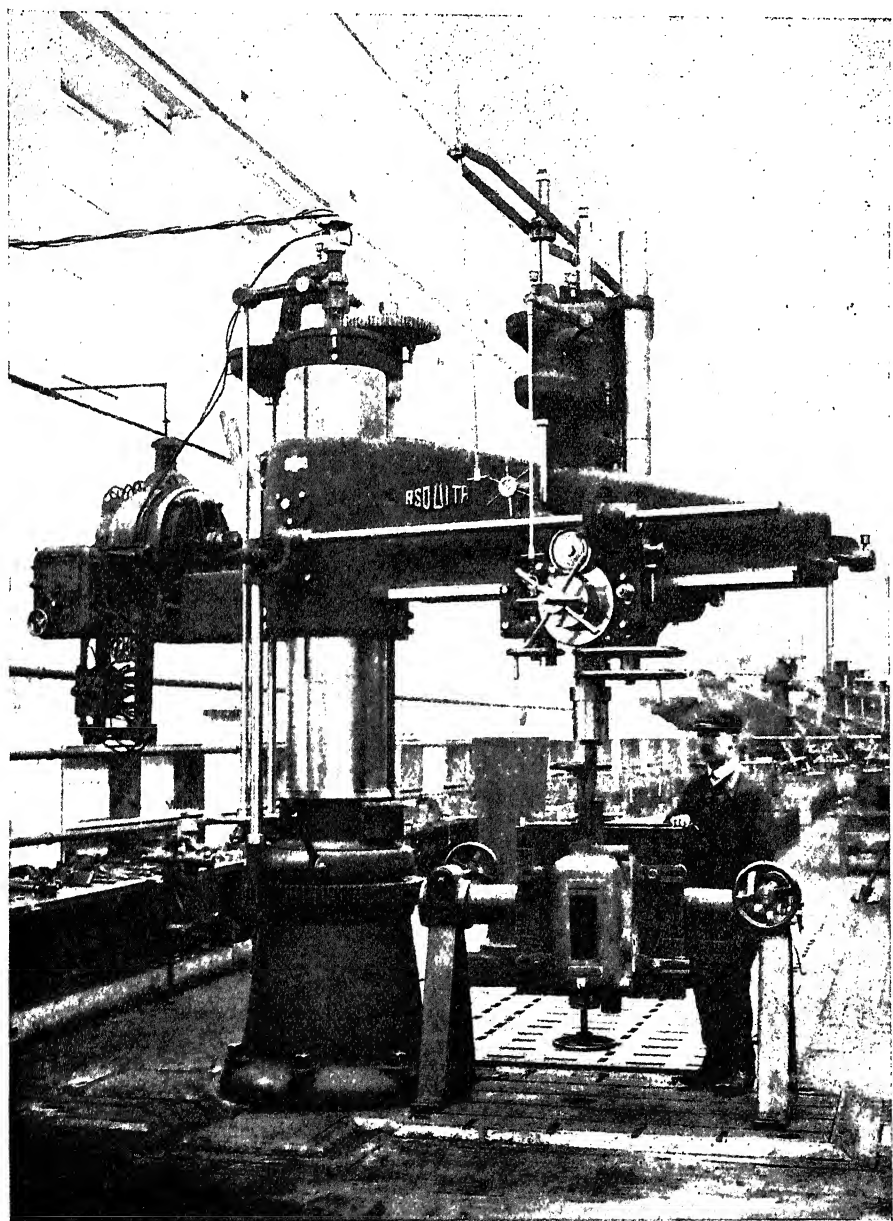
Radial Drilling Machine, Electrically Driven, Central Thrust, with Universal Tilting Work-table
